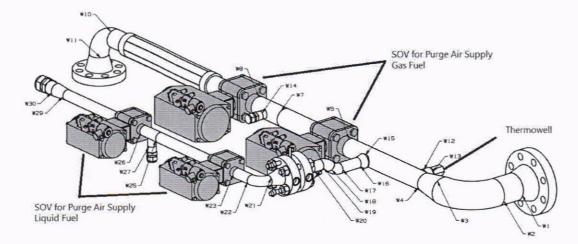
PAPS Purge Air supply pipe spool assembly. Obsolete valves shown in red for reference.
